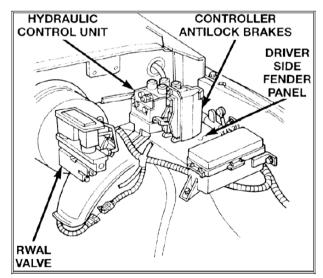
Location of the Hydraulic Control Unit in the car engine.
